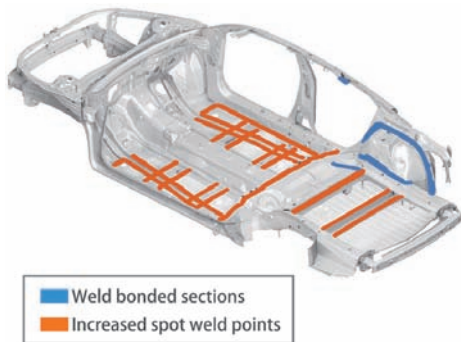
Weld Bonding, Increased Spot Weld
